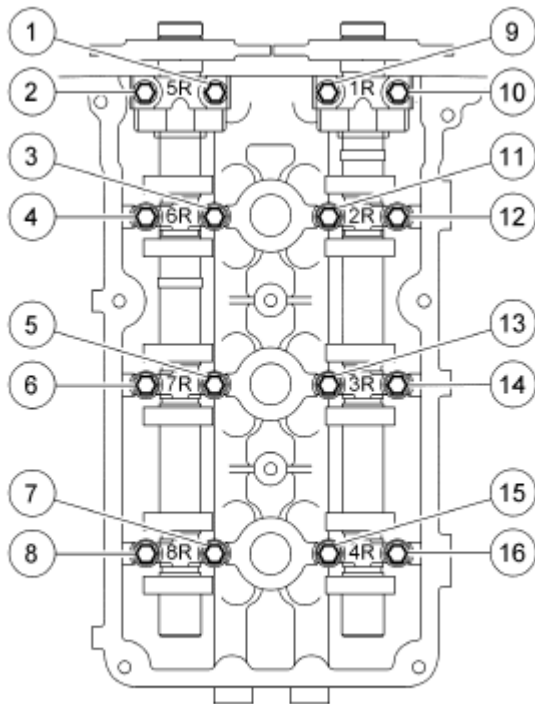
Identifying Camshaft Bearing Caps Bolts Loosening Sequence
